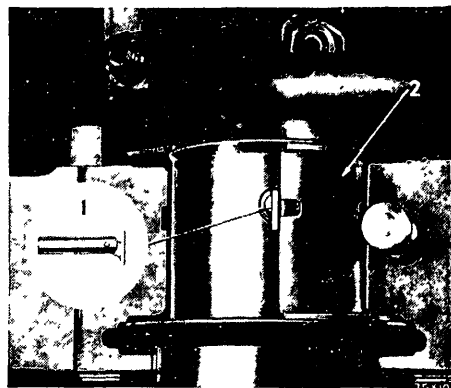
1935-52. Using special tool (1) in oil hole to turn upper main bearing in place
